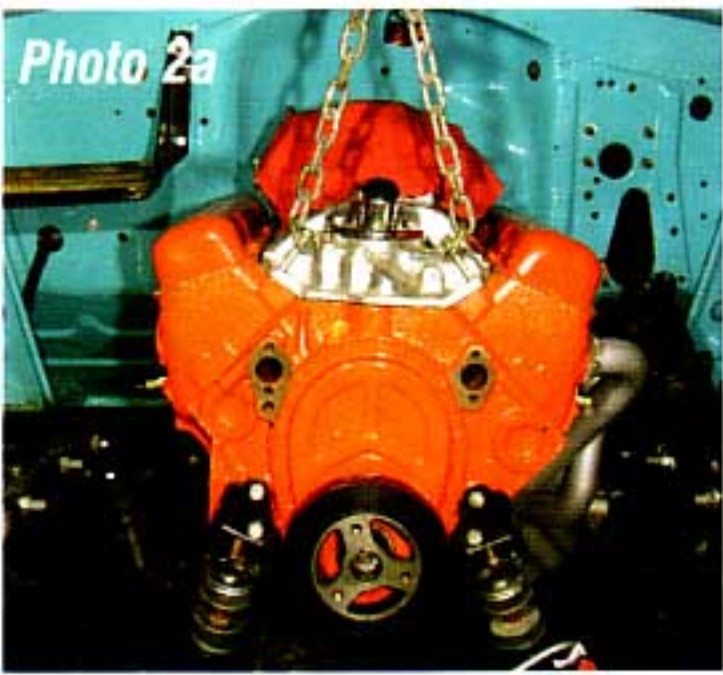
& 2b: The engine must be supported on the driver's side using a floor jack or engine hoist. Raise the driver's side of the engine so that there is no load on the left front engine mount. Remove the two 9/16" X 1" bolts and lock washers and the angle mount.
